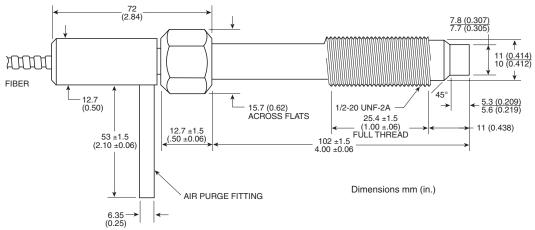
Polymer Bolt Assembly (L3) with 90° Angle Air Purge Fitting
